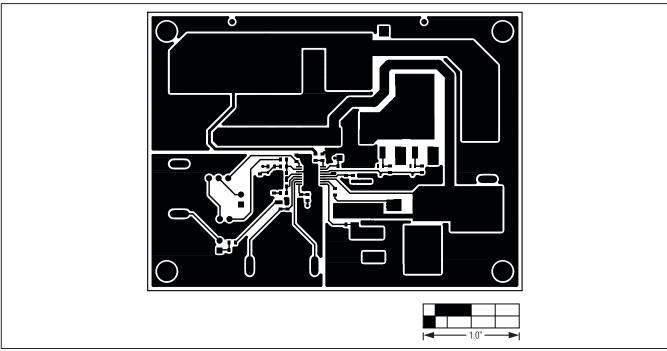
MAX16833 EV Kit Component PCB Layout—Component Side
